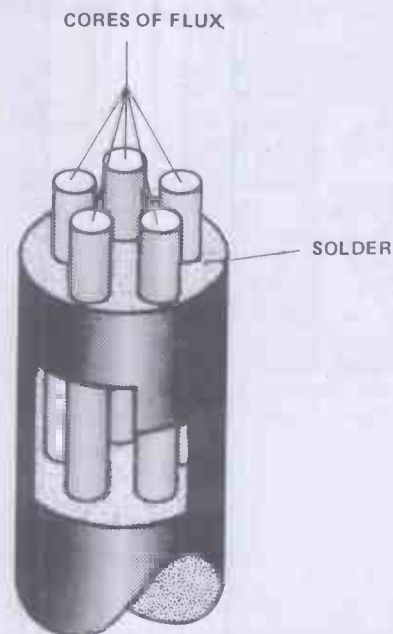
A magnified view of a piece of five-cored solder. The five cores of flux will melt when the solder is heated.
